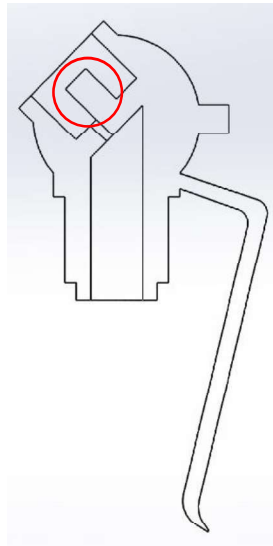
Cross-sectional view of the pressure gauge cap, detailing internal features.
